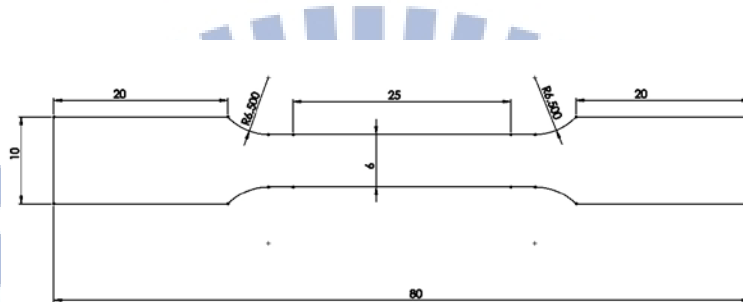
The dimension of the standard specimen for a tensile test. (Unit: mm)
